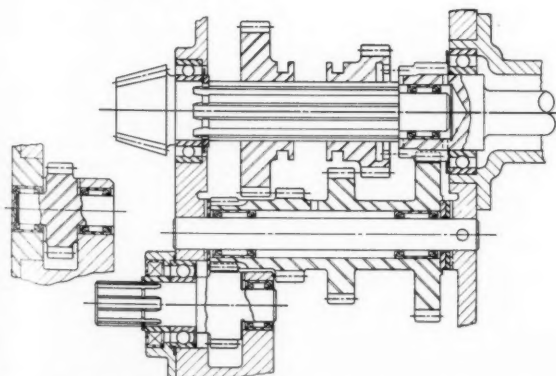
(Left and Right) Torrington needle bearings and LN needle rollers both lend themselves for use in heavy-duty transmissions and gear-boxes for tractors and trucks, particularly for solving load, lubrication, and limited space problems in countershaft, cluster gear, idlers, pilot and reverse idler positions
